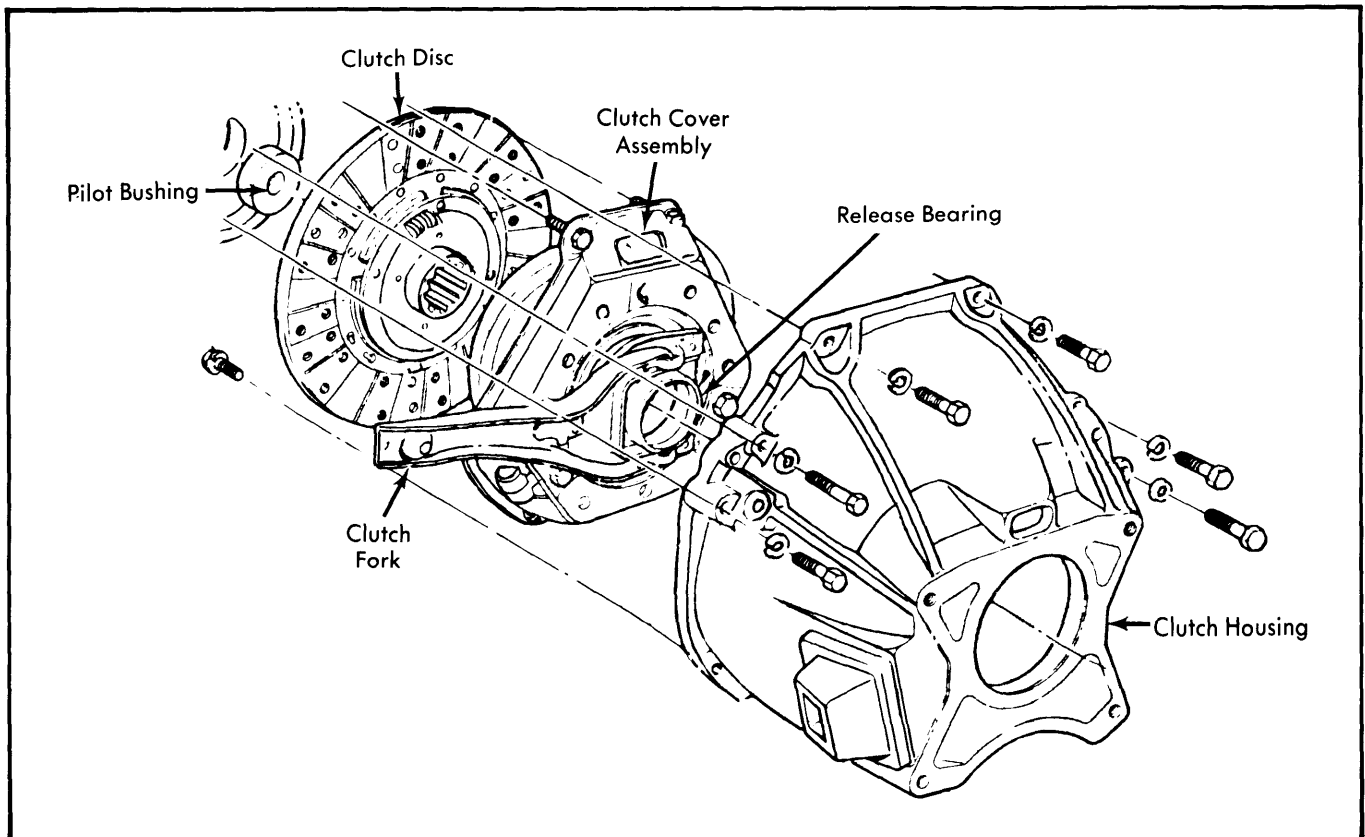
Exploded View of Typical Ford Clutch Assembly
